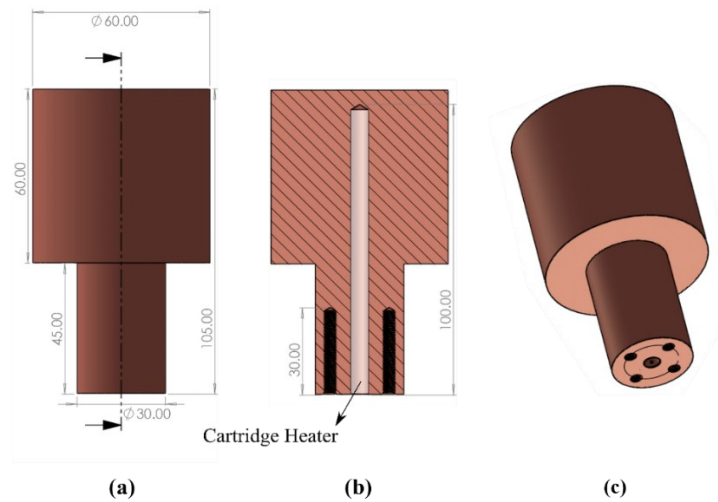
(a) Front, (b) sectioned, and (c) isometric view of heater
